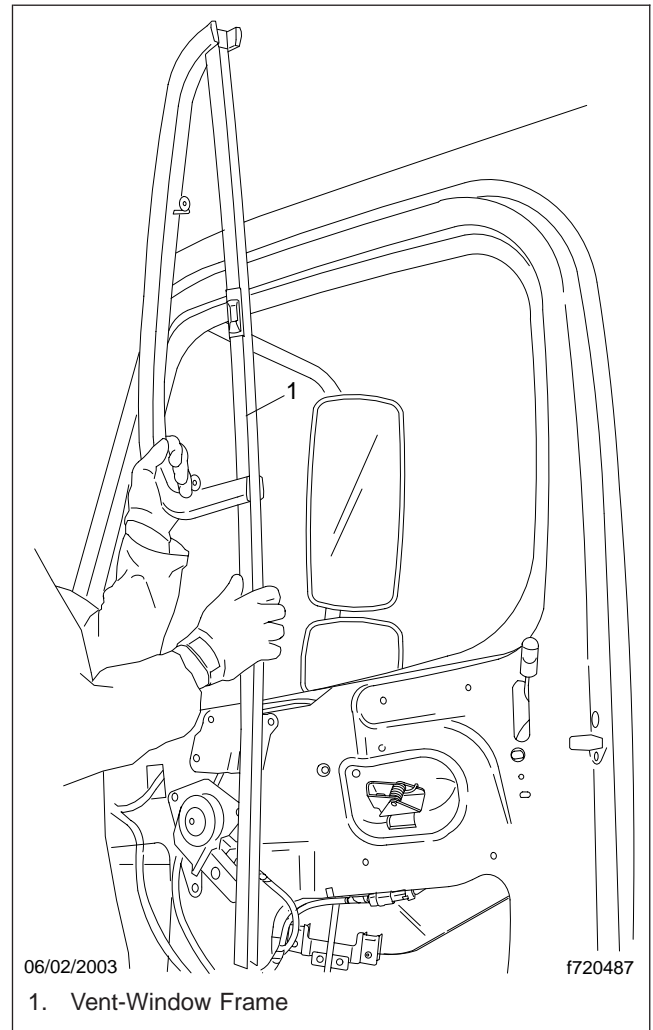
, Remove/Install the Vent-Window Frame Assembly
